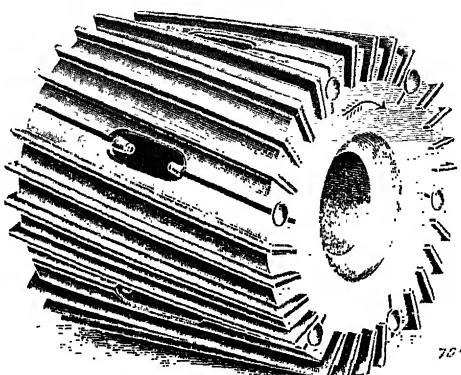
B.—Plain slab milling cutter, with inserted teeth.
